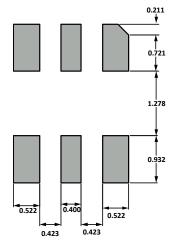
Recommended Solder Paste Stencil Pattern Layout
